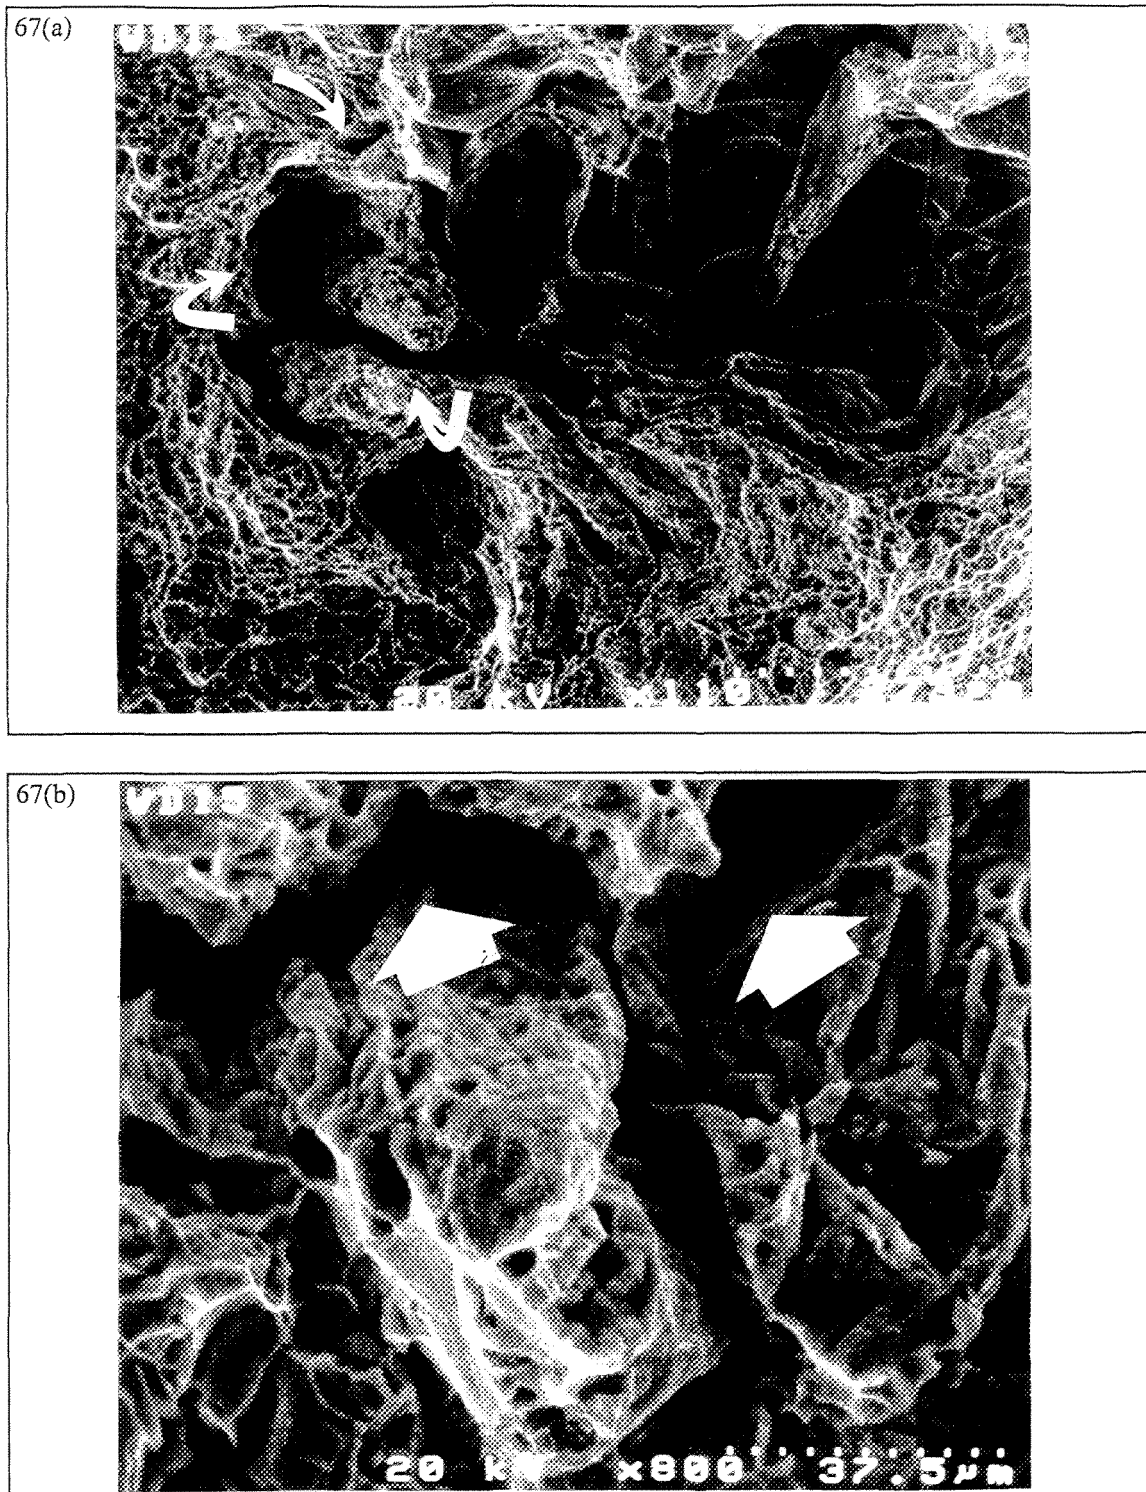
Fracture surfaces showing crack paths located at oxide/matrix interfaces in the samples corresponding to those shown in a) Fig.61(a), and b) Fig.61(c).
